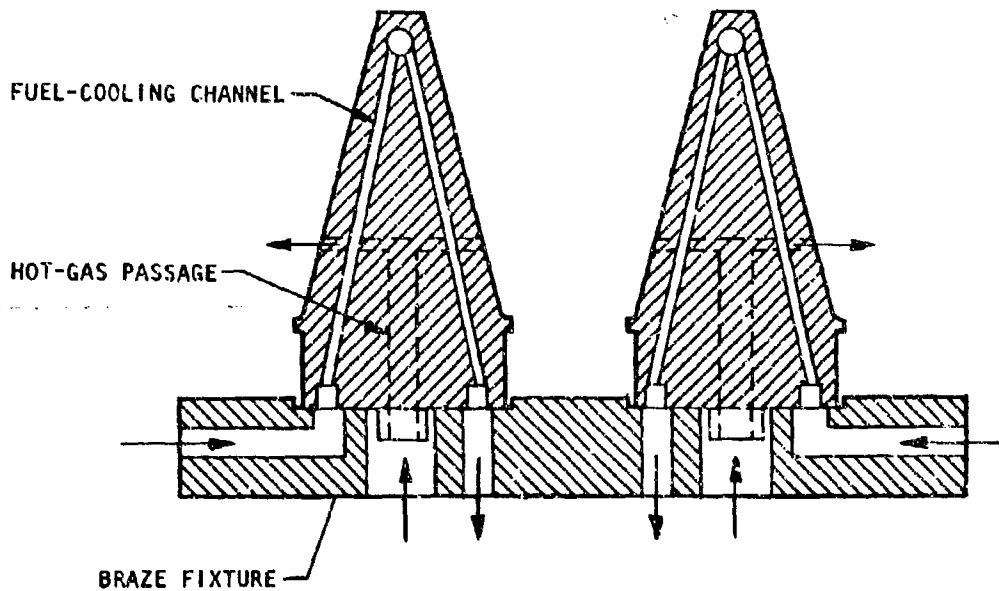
Section Through Braze Fixture and Two Baffles Showing Gas Purge System (Arrows Indicate Direction of Gas Flow)
